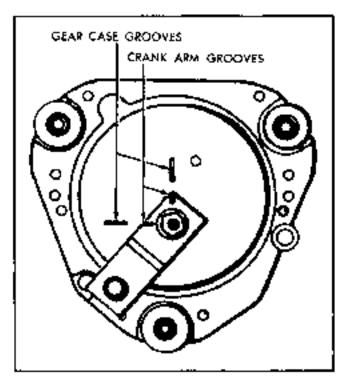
Crank Arm in Park Position—Tempost and Firebird
